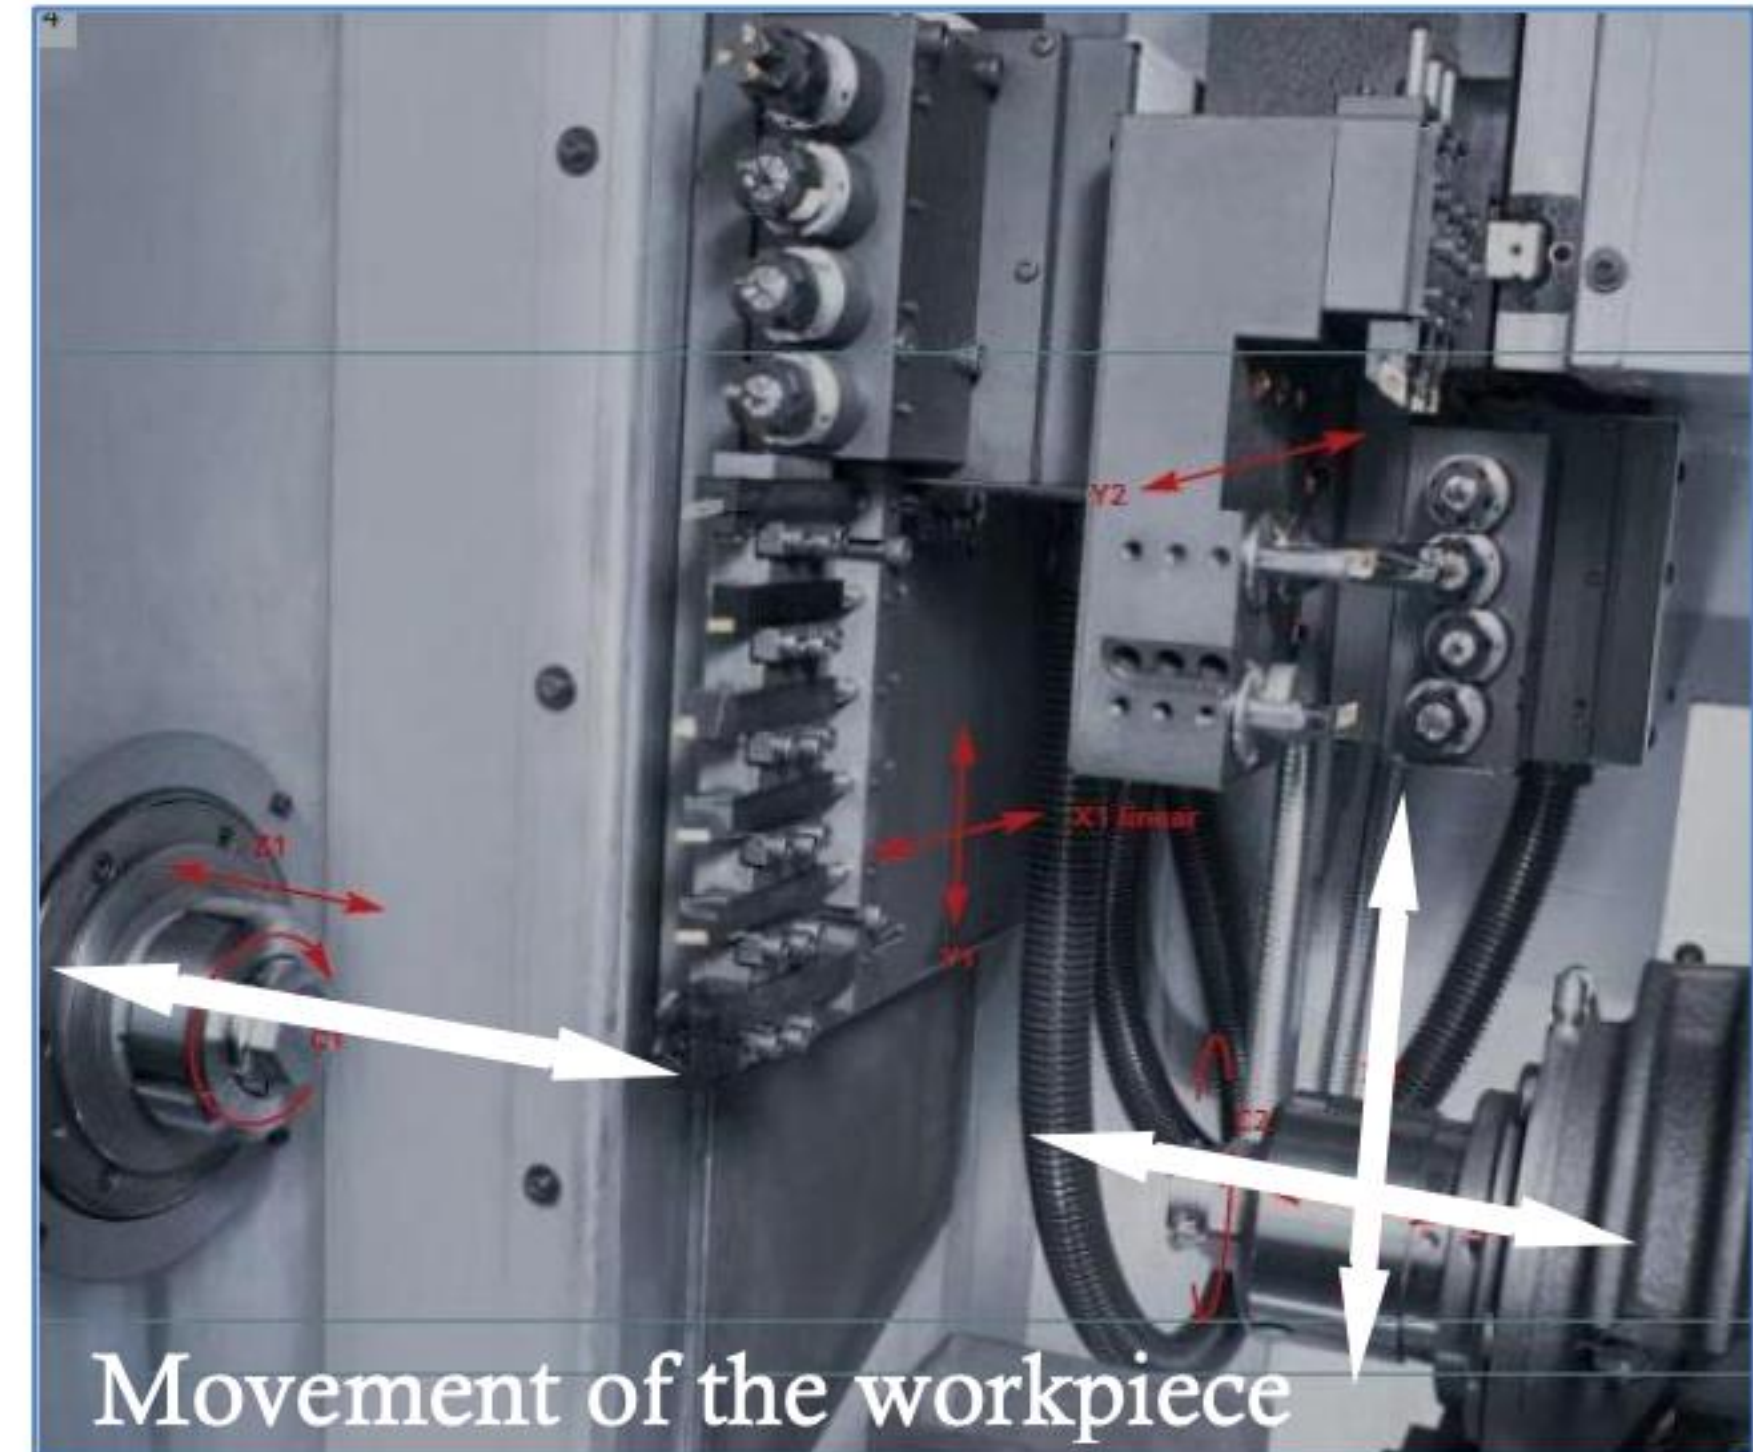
Lathe with real movement of the Z-axis and of the X-axis on the workpiece
